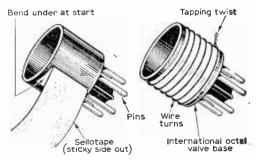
Preparing a valve-base "former" and winding a typical coil.
